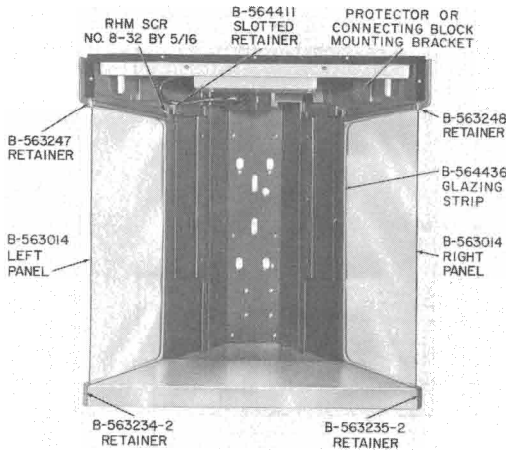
KS-19426, List 1 Housing Showing Installation of Panels
